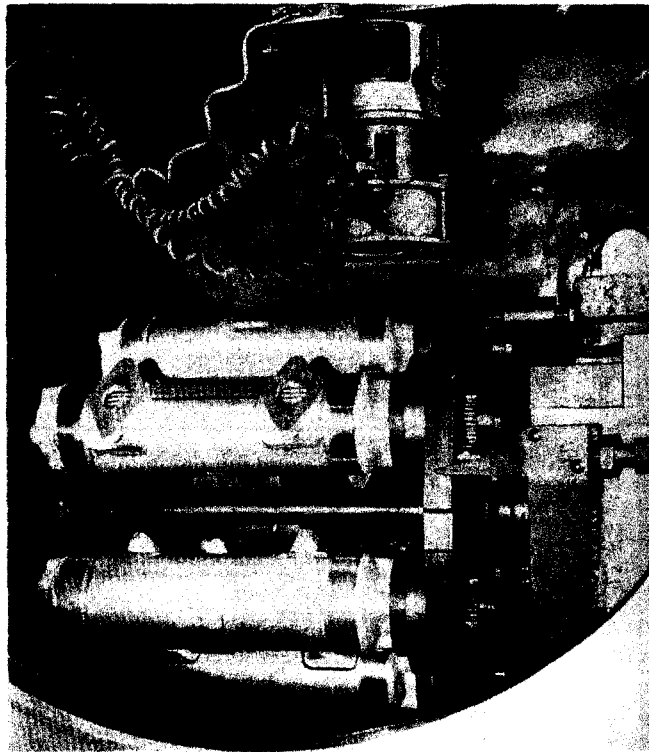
A Loaded Rotary Welding Fixture in Location Beneath the Electron Beam Gun
